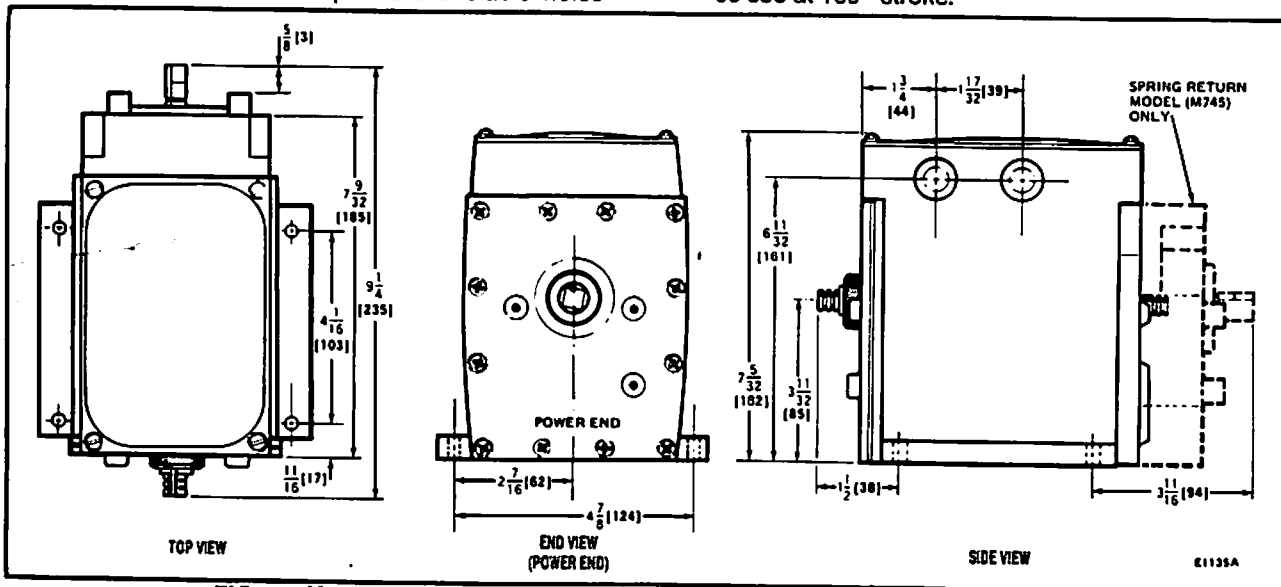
M744 AND M745 MOUNTING DIMENSIONS IN in. [mm IN BRACKETS].
